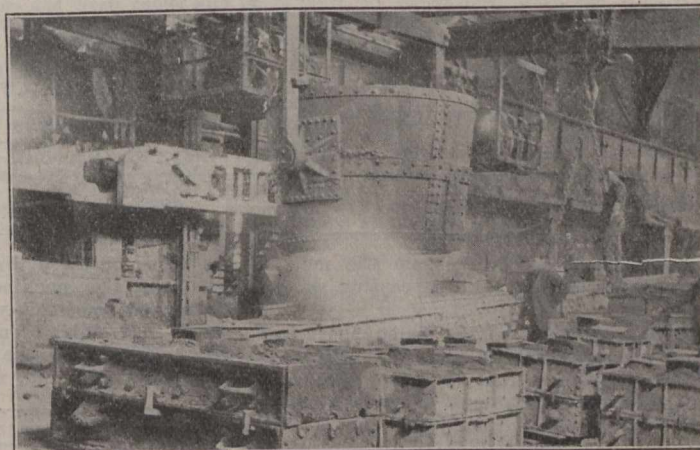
Pouring a Cast Steel Locomotive Frame.
